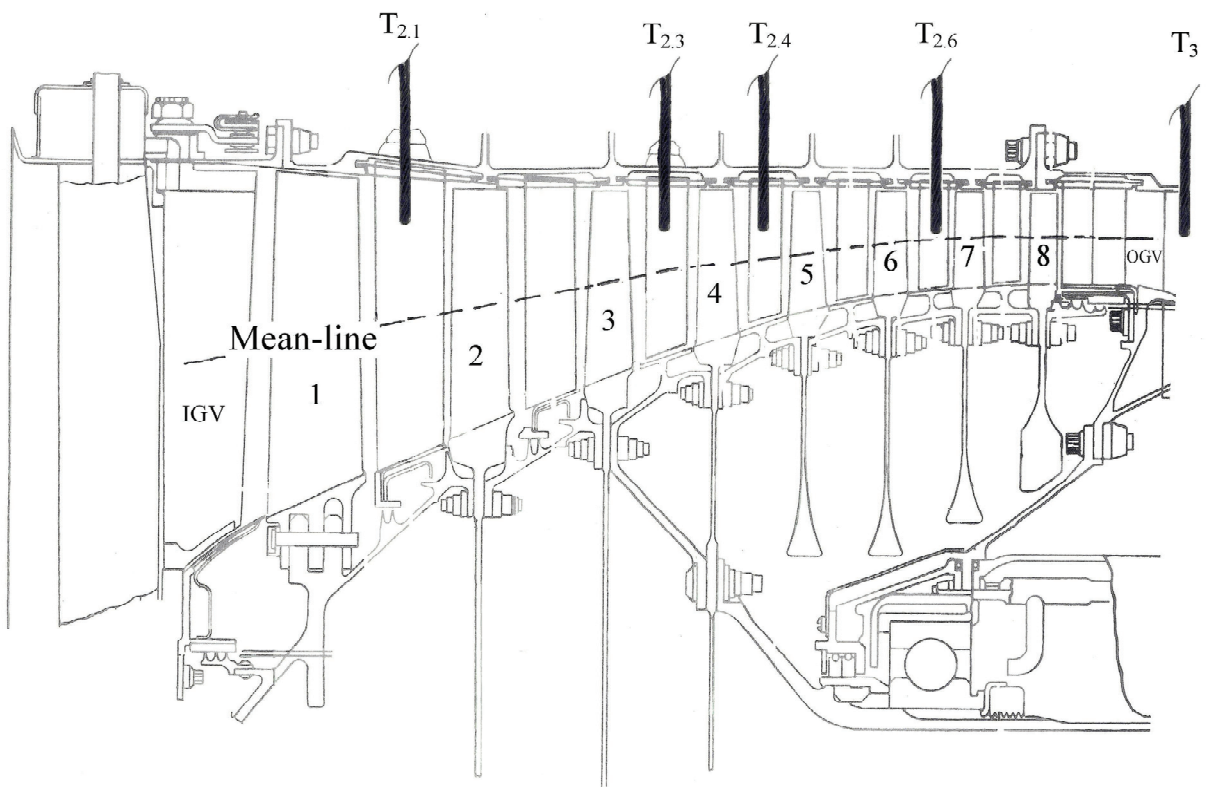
GE J85-13 compressor cross-sectional view with temperature sensors
